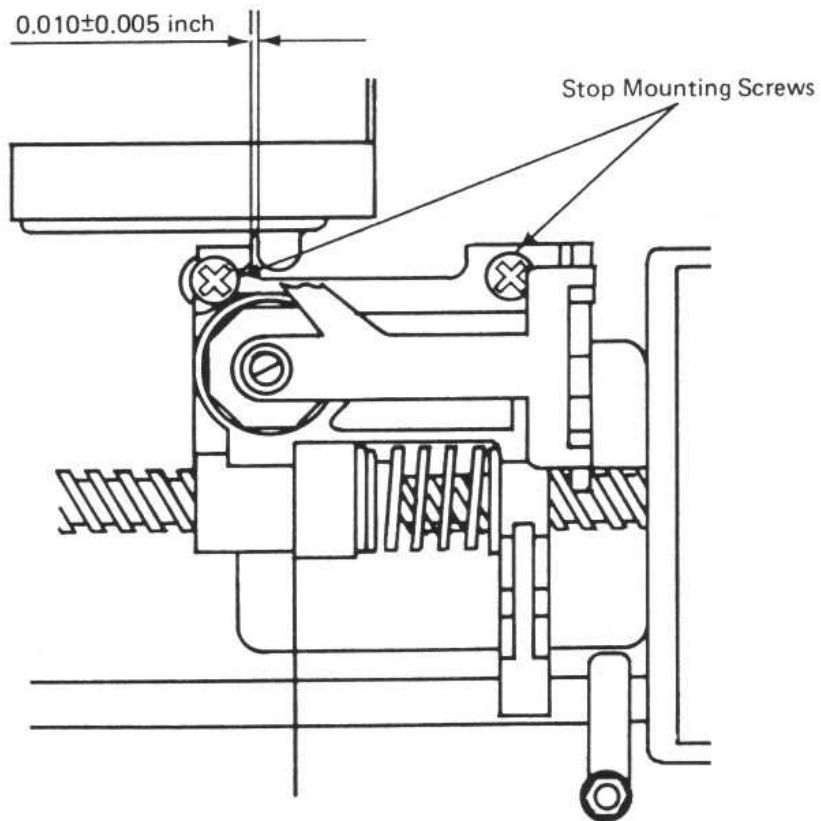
TRACK 00/39 STOP ADJUSTMENT
